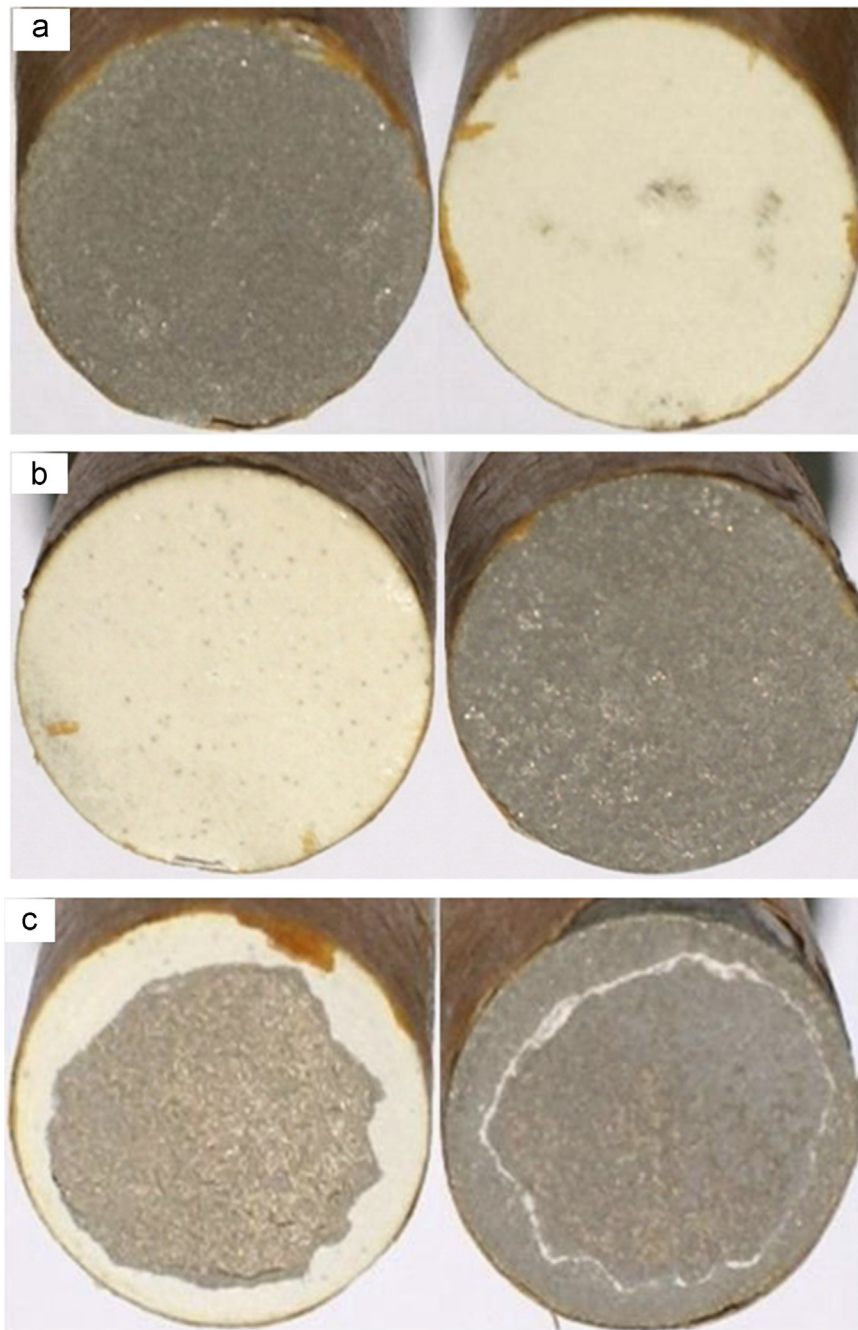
Fractured surfaces of the three coating systems showing location of failure (failure locus), (a) duplex, (b) three-layer FG-TBC and (c) five-layer FG-TBC.
